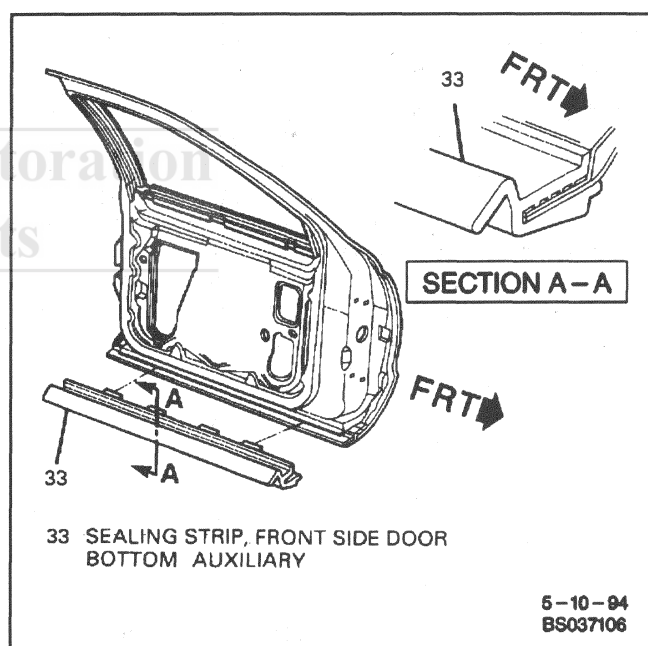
Removing Front Side Door Bottom Auxiliary Sealing Strip
